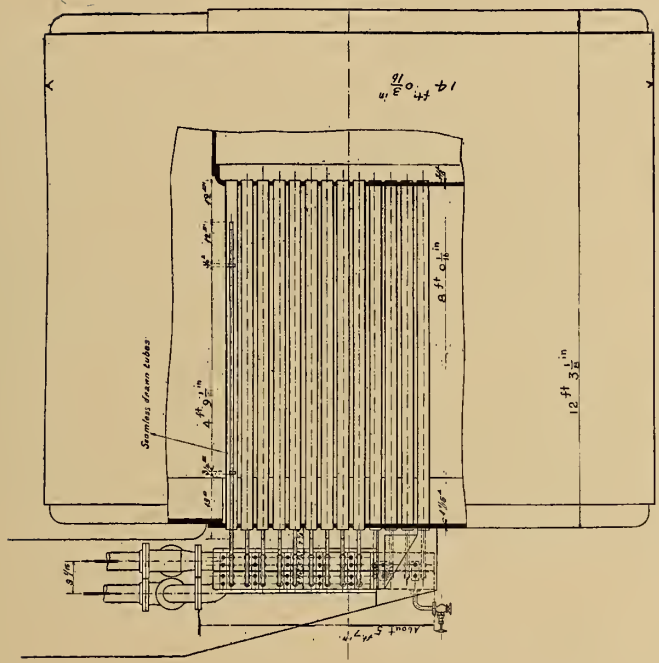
LONGITUDINAL SECTION OF BOILER WITH SCHMIDT SMOKE-TUBE SUPERHEATER
